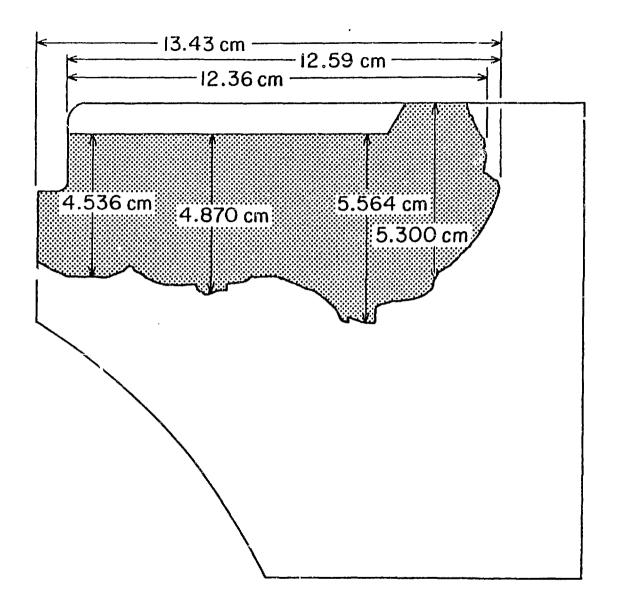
Fracture face of turbine disc after opening of crack with compression tester. Cooper Turbine
